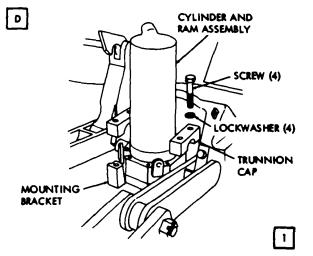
Removal or installation of hydraulic cylinder and ram assembly.
